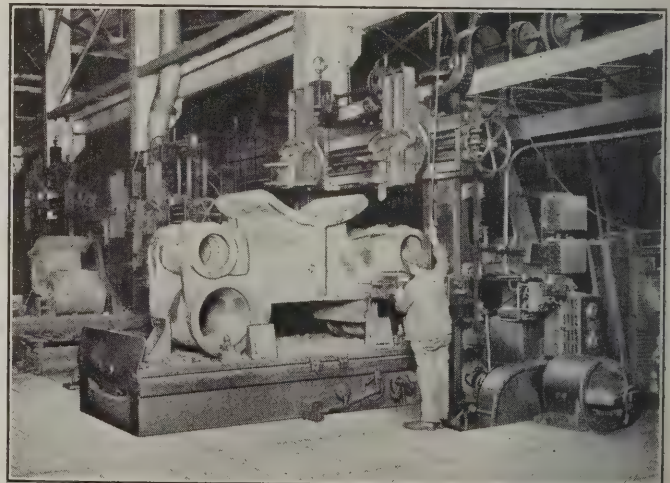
Planer Driven By 25 Hp. Adjustable Speed Reversing Planer Motor
